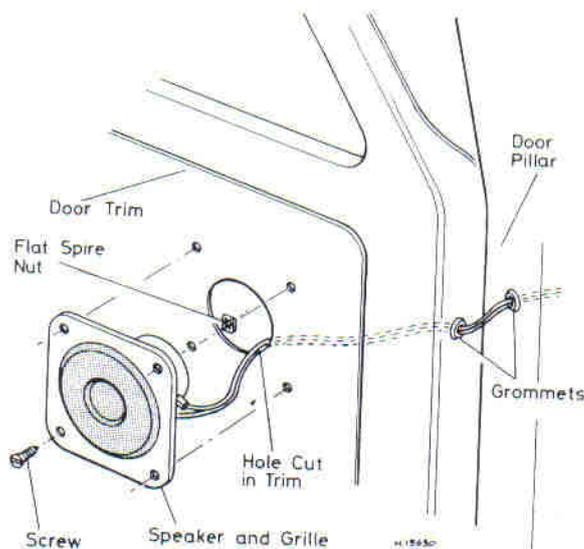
Door-mounted speaker installation (Sec 42)
